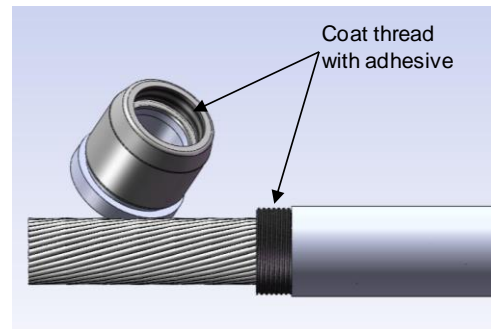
Apply adhesive to the threaded shoulder and the internal threads of the collar.
